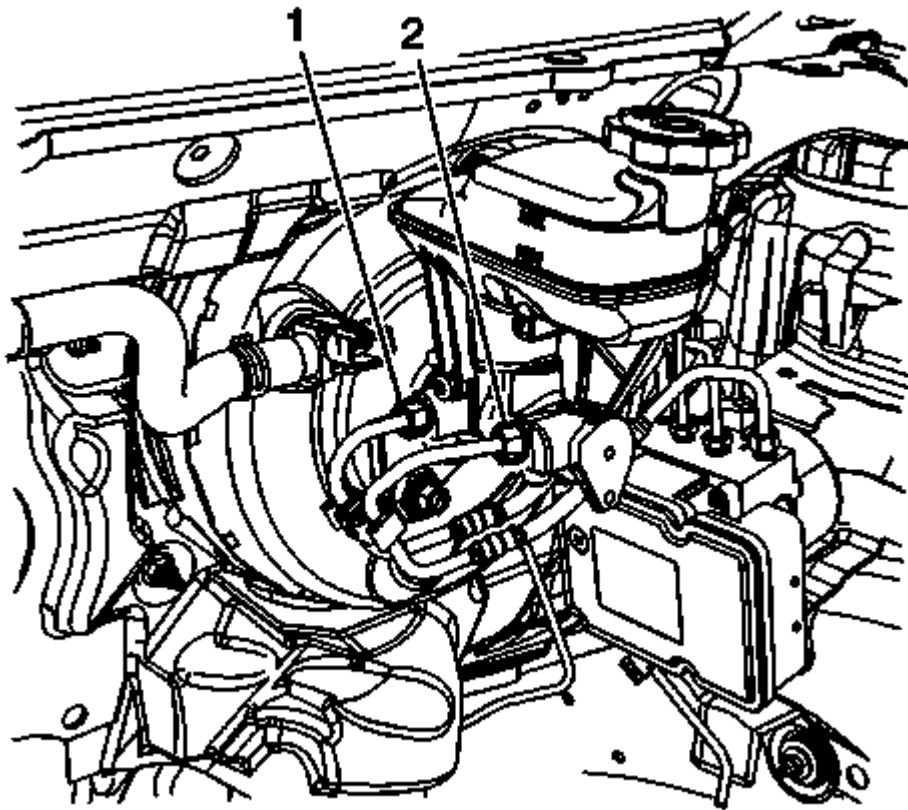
Master Cylinder Primary And Secondary Brake Pipe Fittings
